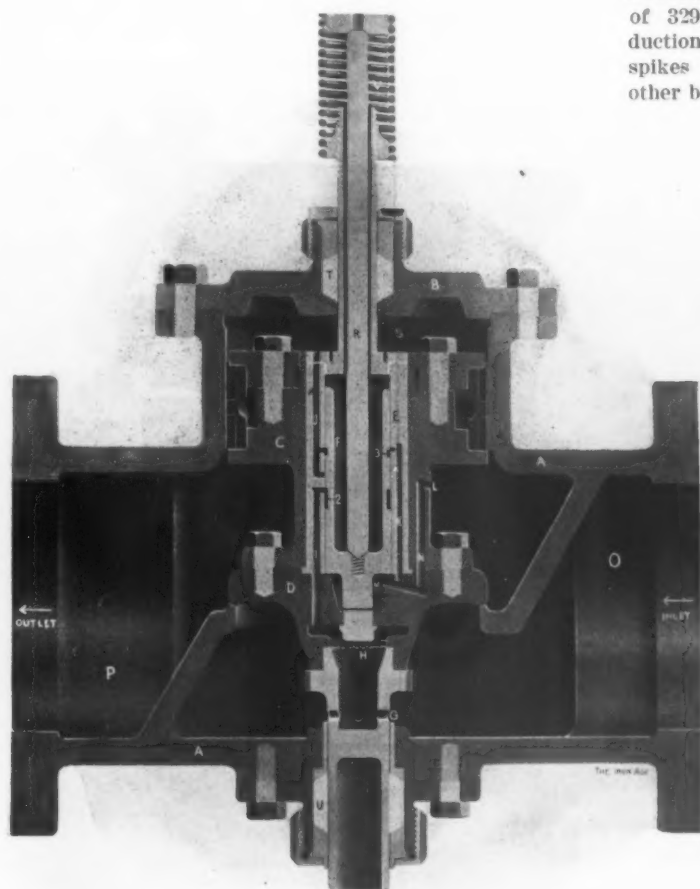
Sectional View of the Steam Pressure Regulator.
